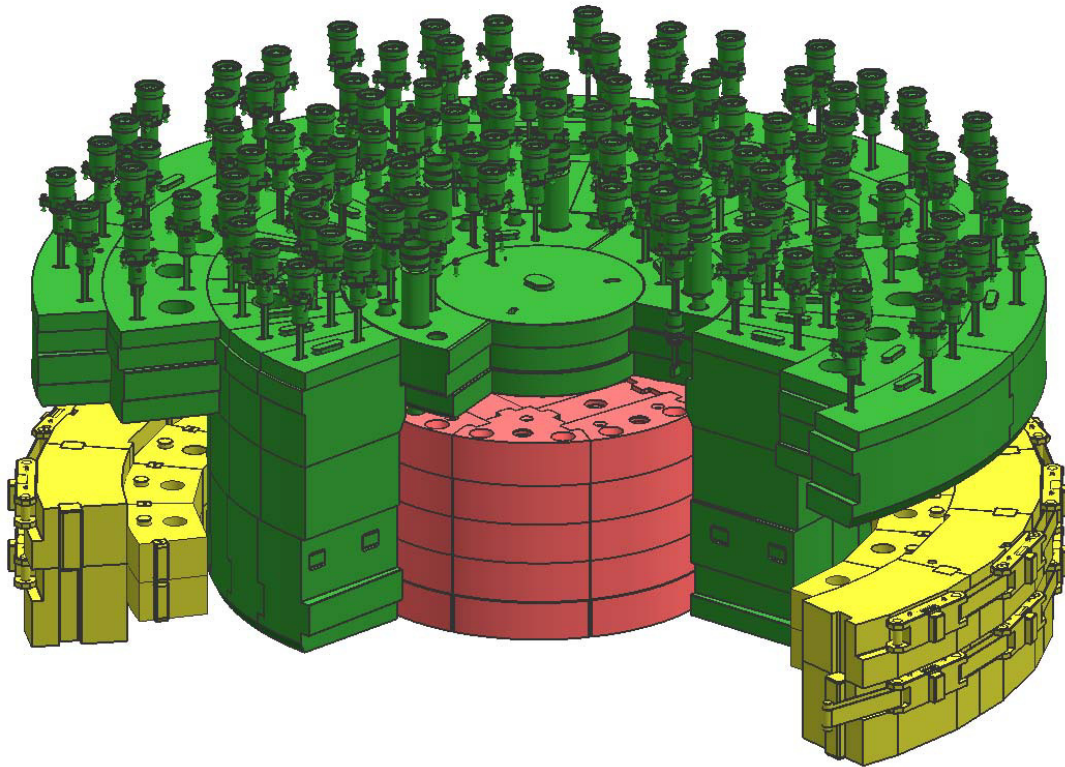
Tie Rod Assembly Cutaway Looking From the Top [12]
